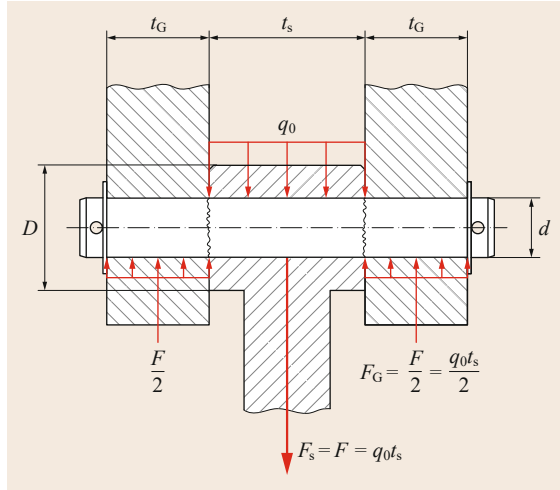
Basic design and loading of a bolted joint with related dimensions
